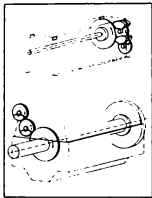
Sulzer engine second-order balancer gear arrangement
